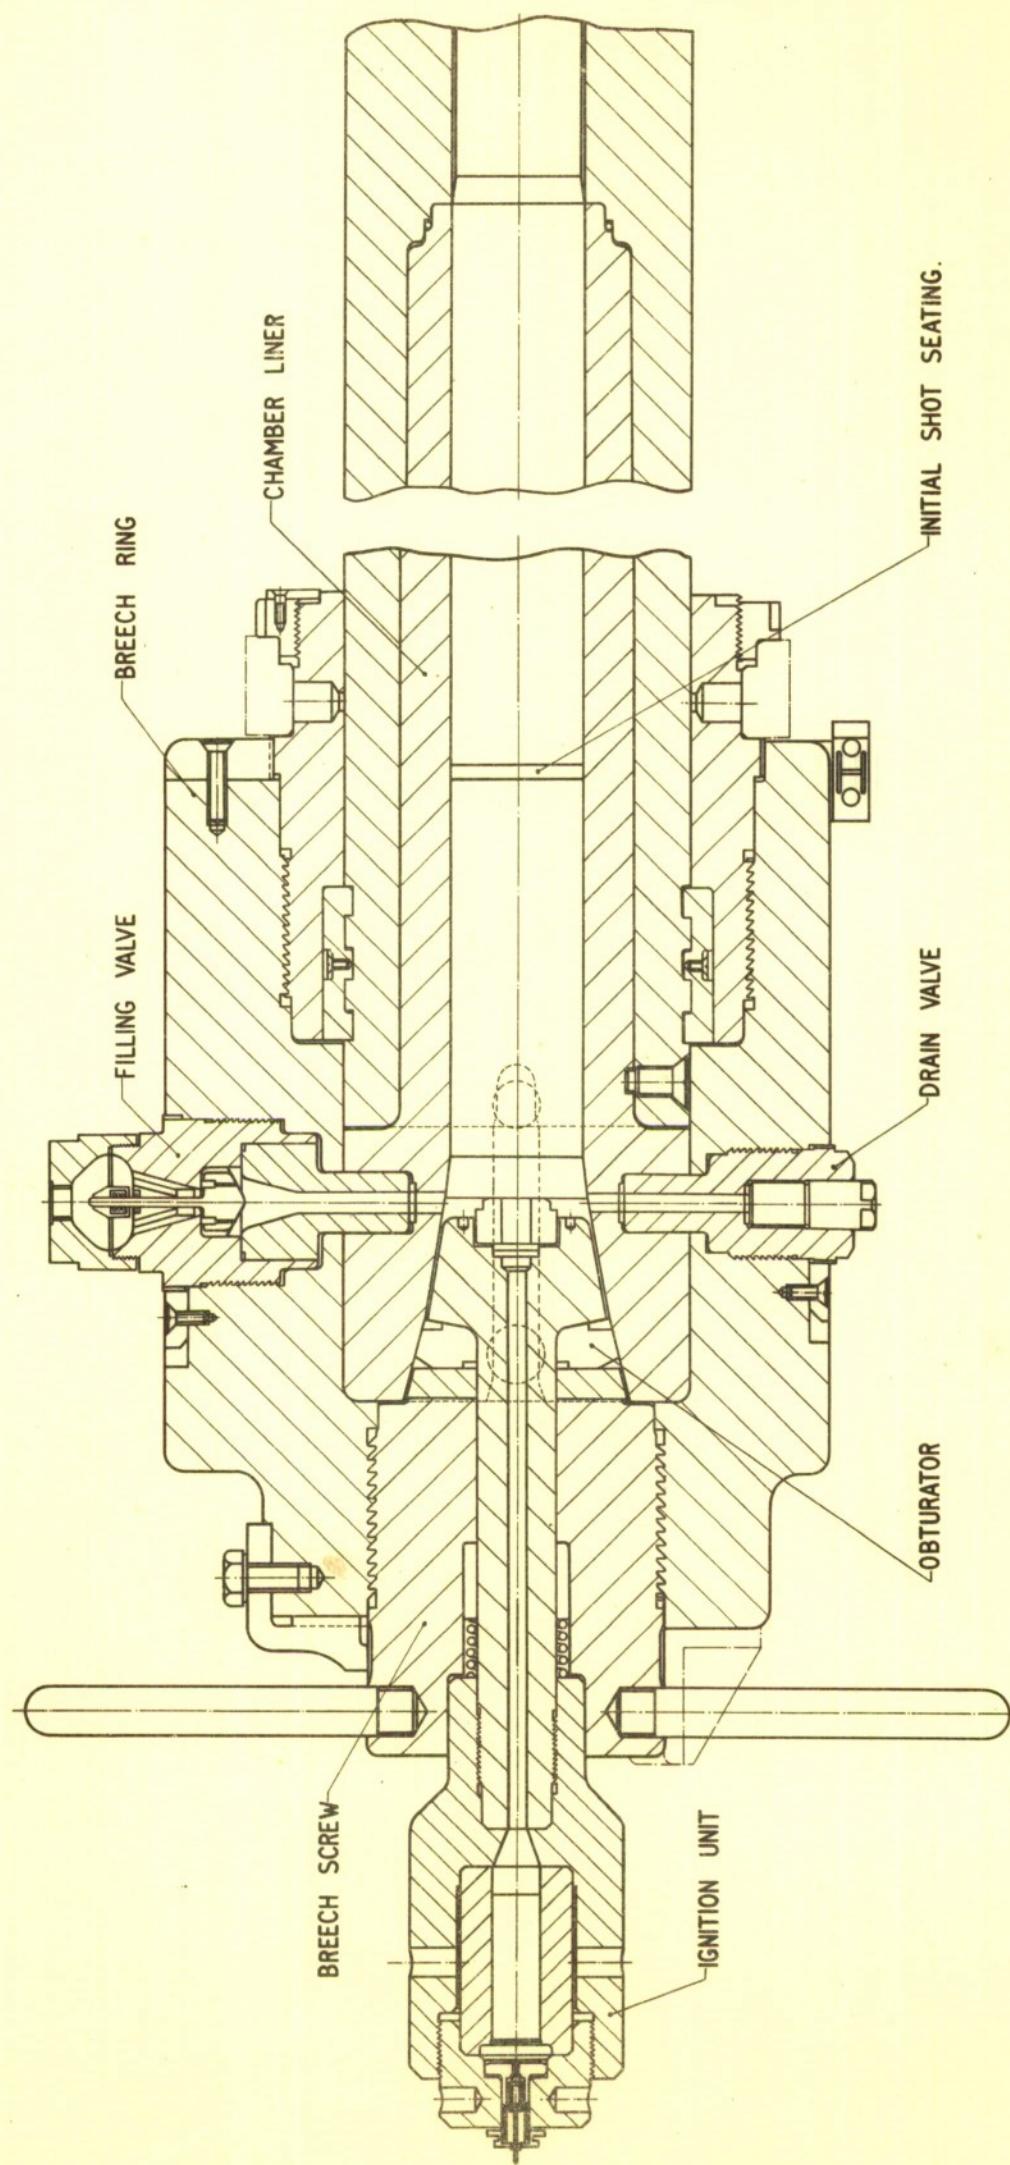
20 PR. BULK LOADED SLAVE GUN.
